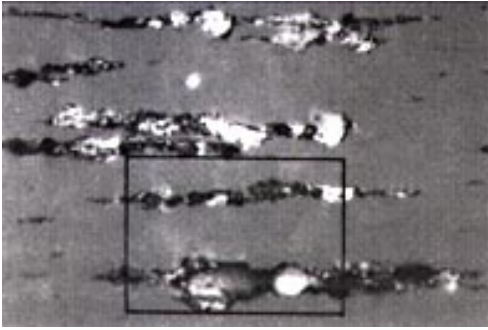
Gear wear fatigue in Fig. 6 at a higher magnification
